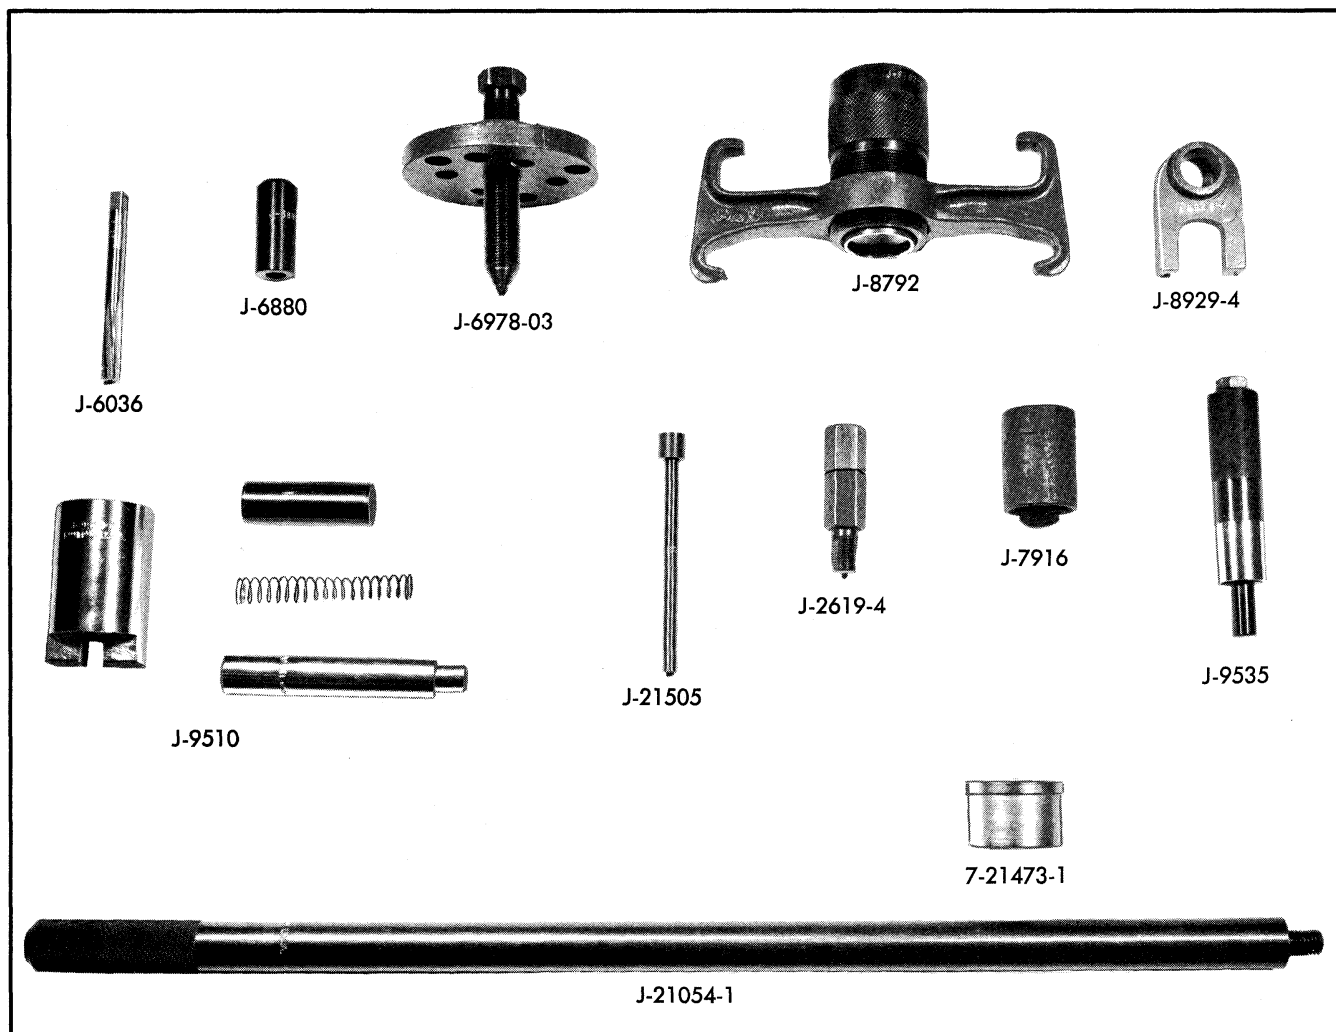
Special Engine Tools (6 Cylinder Engine)
